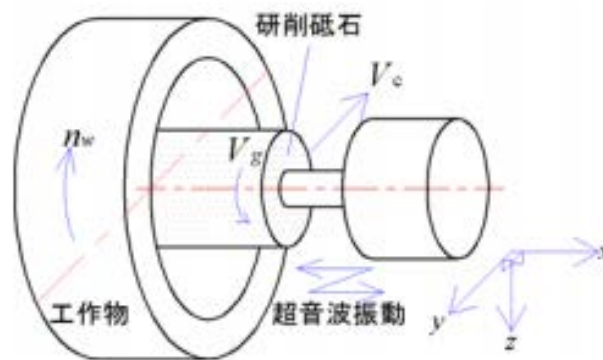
Internal grinding of small holes with ultrasonic vibration
